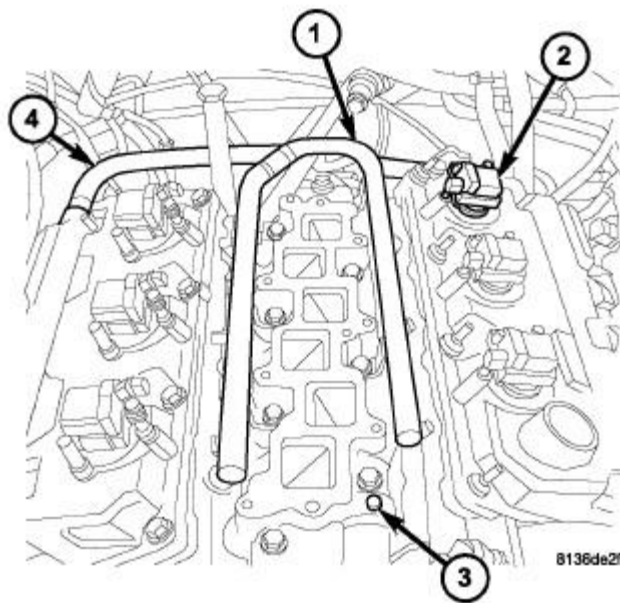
FUEL RAIL AND LOWER INTAKE MANIFOLD
